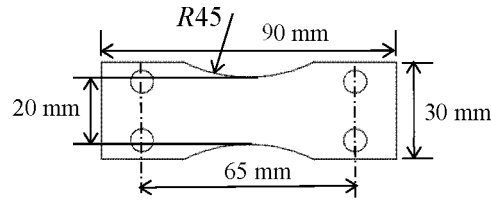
Dimensions of bending fatigue specimen (Thickness : 2 mm)
